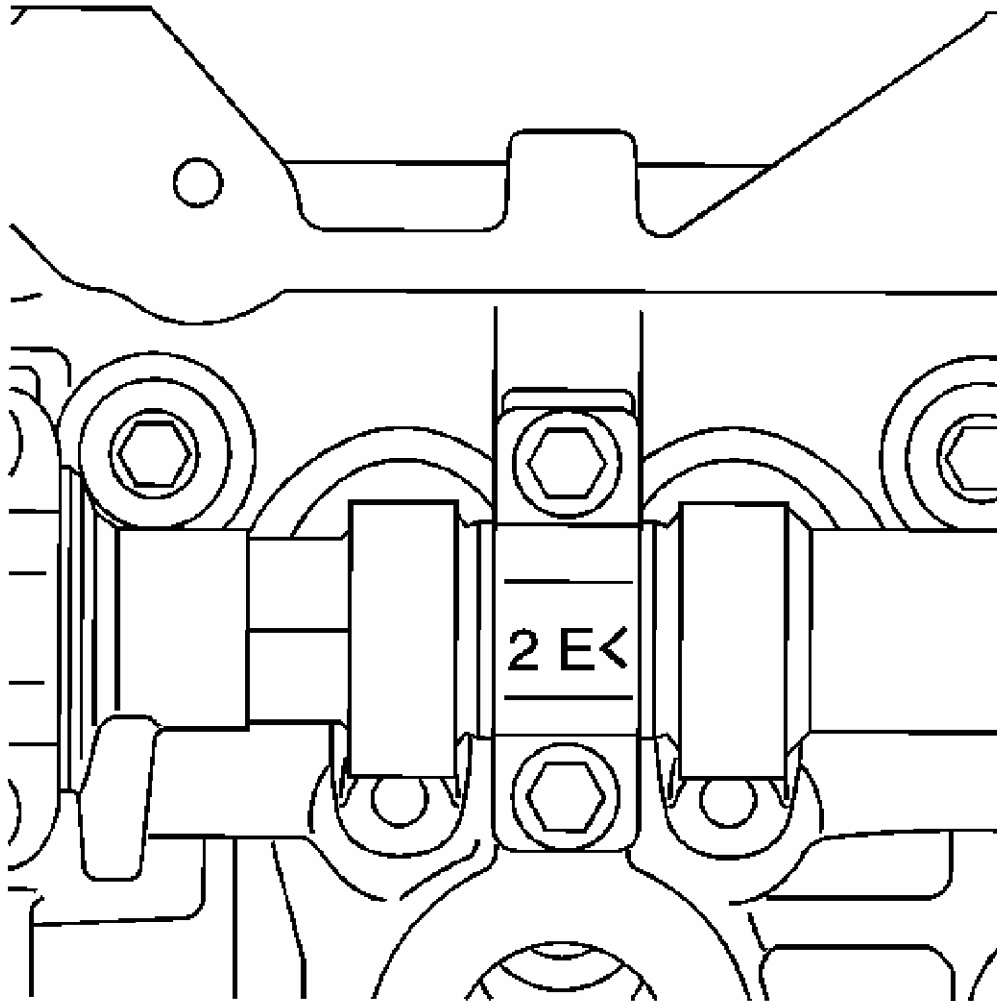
View Of Exhaust Camshaft Bearing Cap Markings
